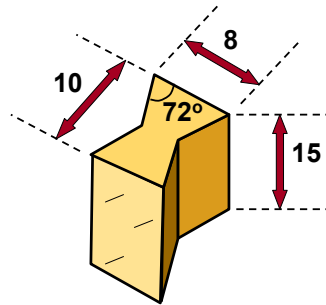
Part of The PVC dovetail joint. The measurements are in mm.
